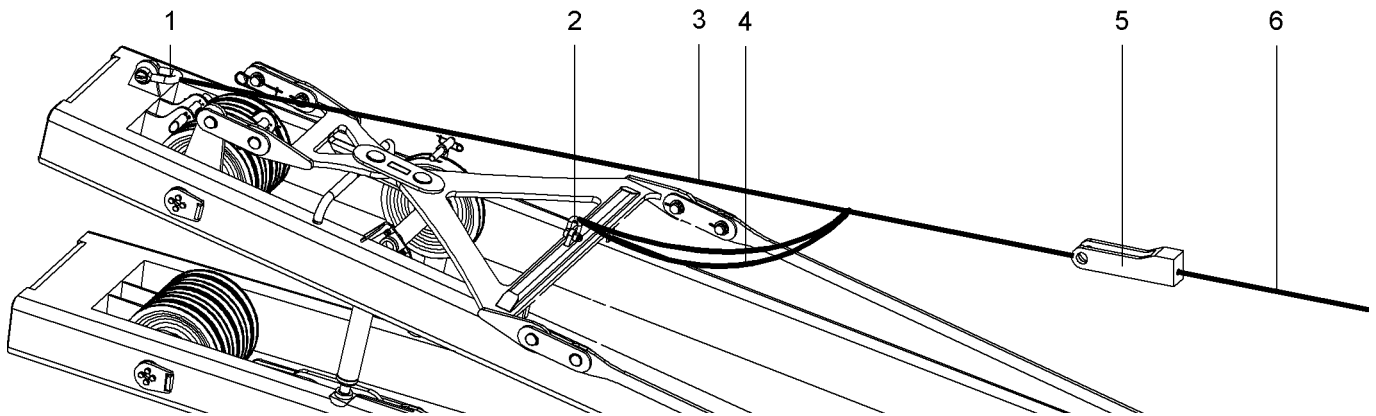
Connect A-frame2 with the rope of winch1/winch2.
